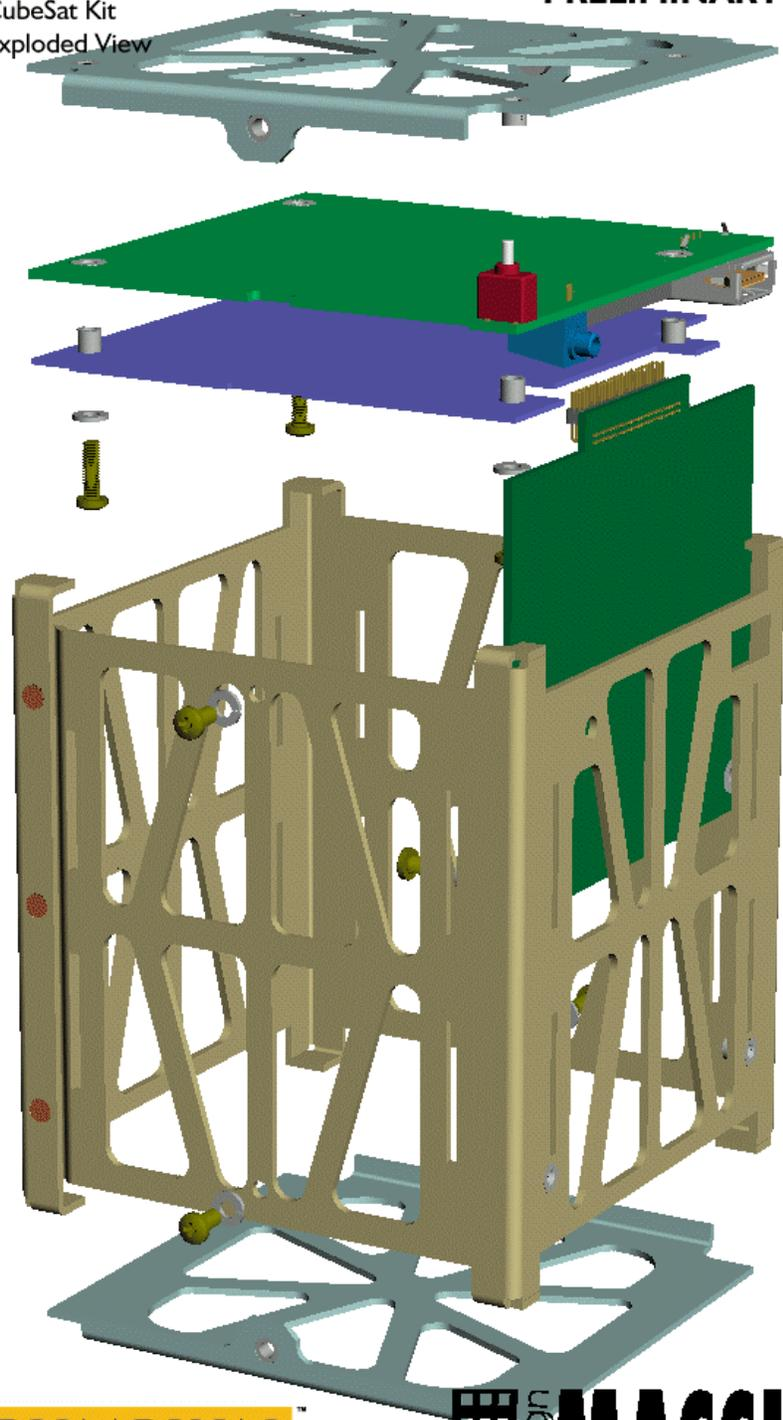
Exploded View, CubeSat Flight Model Kit (Preliminary)
